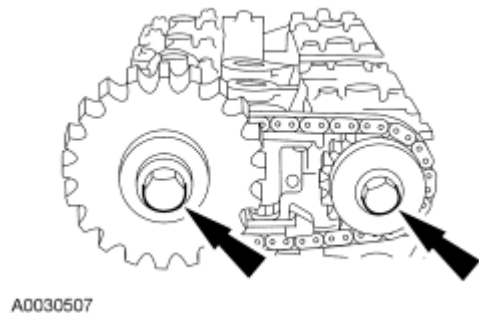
Locating Camshaft Sprocket, Washer & Bolt
